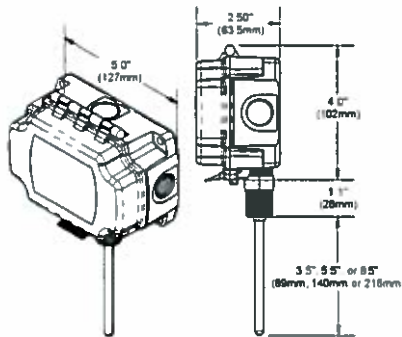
Double Threaded Immersion Sensor in a BAPI-Box (BB) Enclosure
